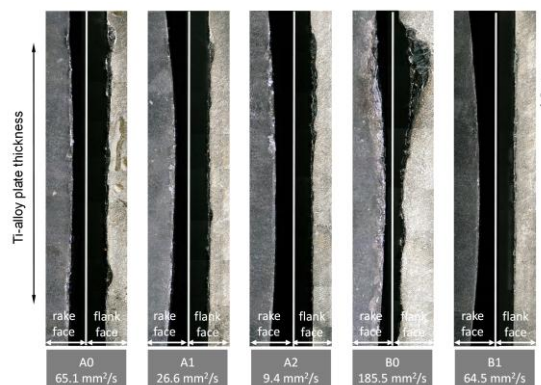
Photomicrographs of tool edge after machining of 7cc in removal volume
